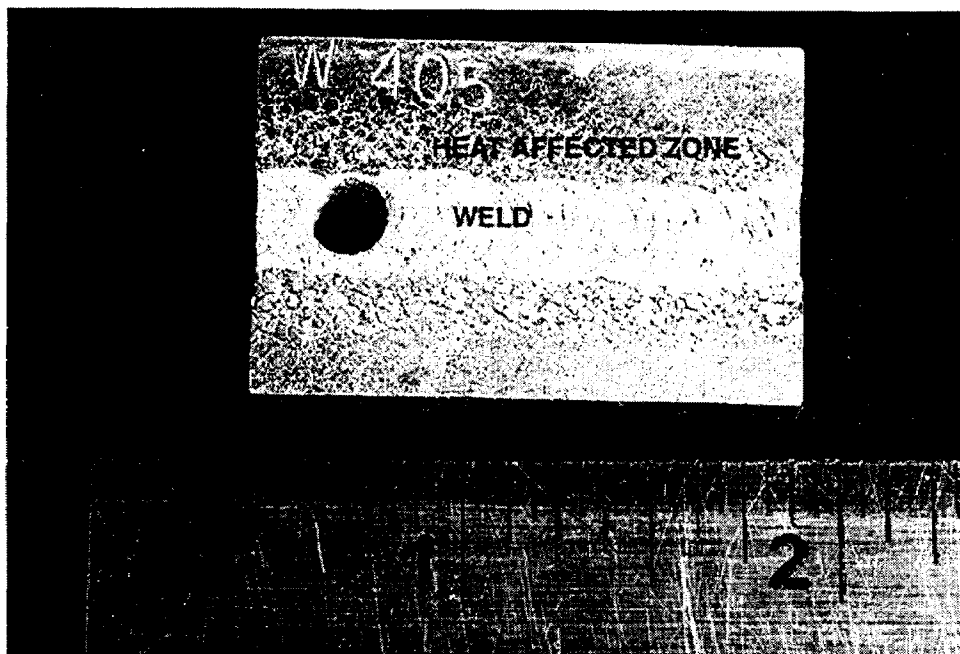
Intergranular Corrosion in the Weld Heat Affected Zone
